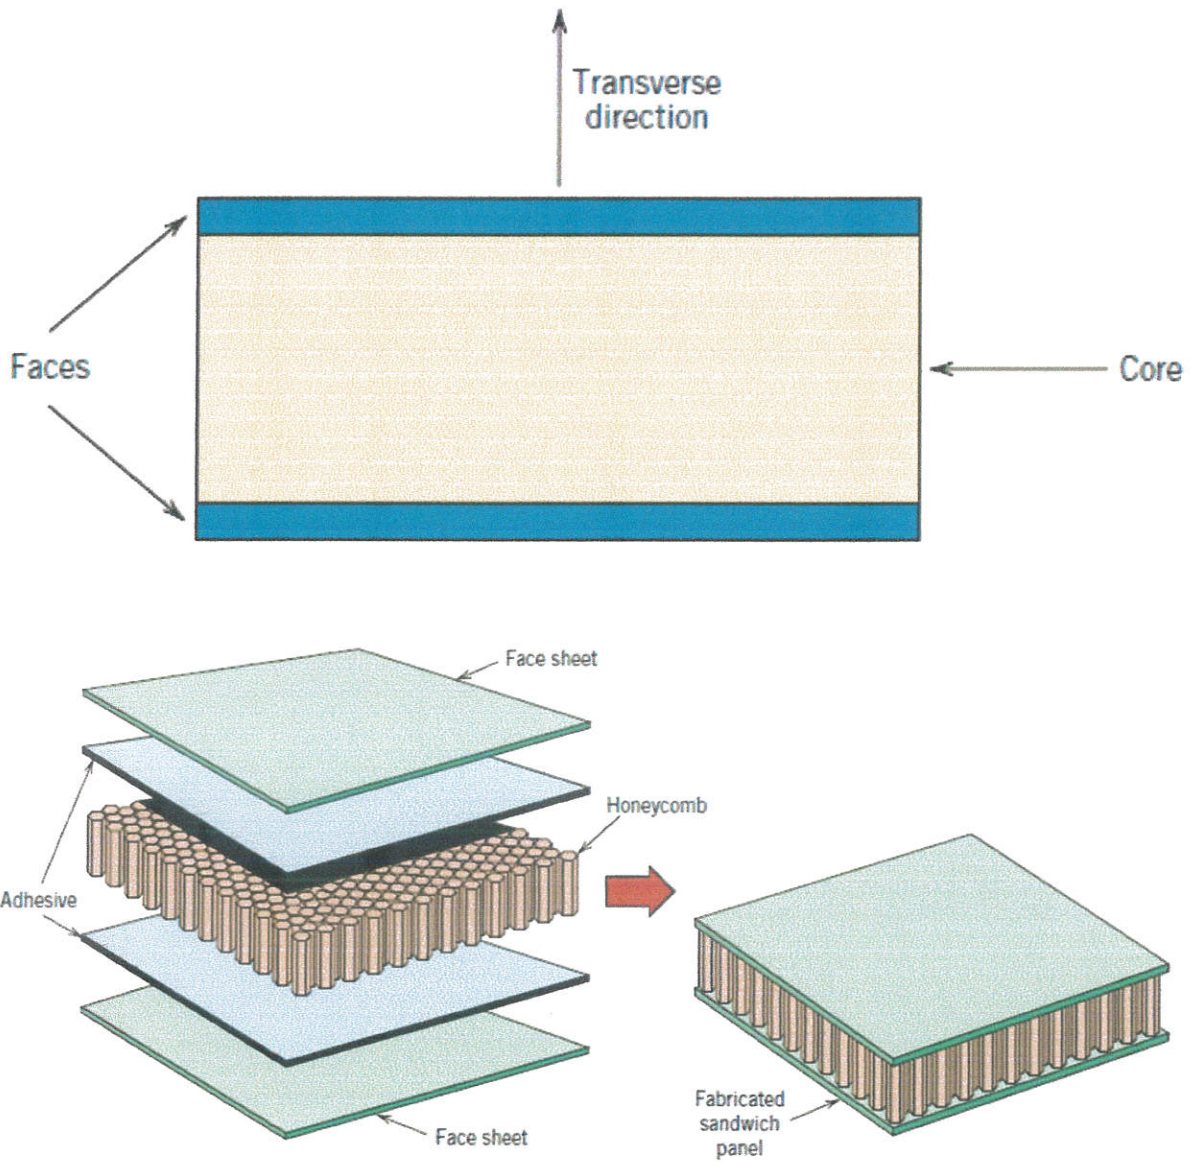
Schematic diagram showing the construction of a honeycomb core sandwich panel
